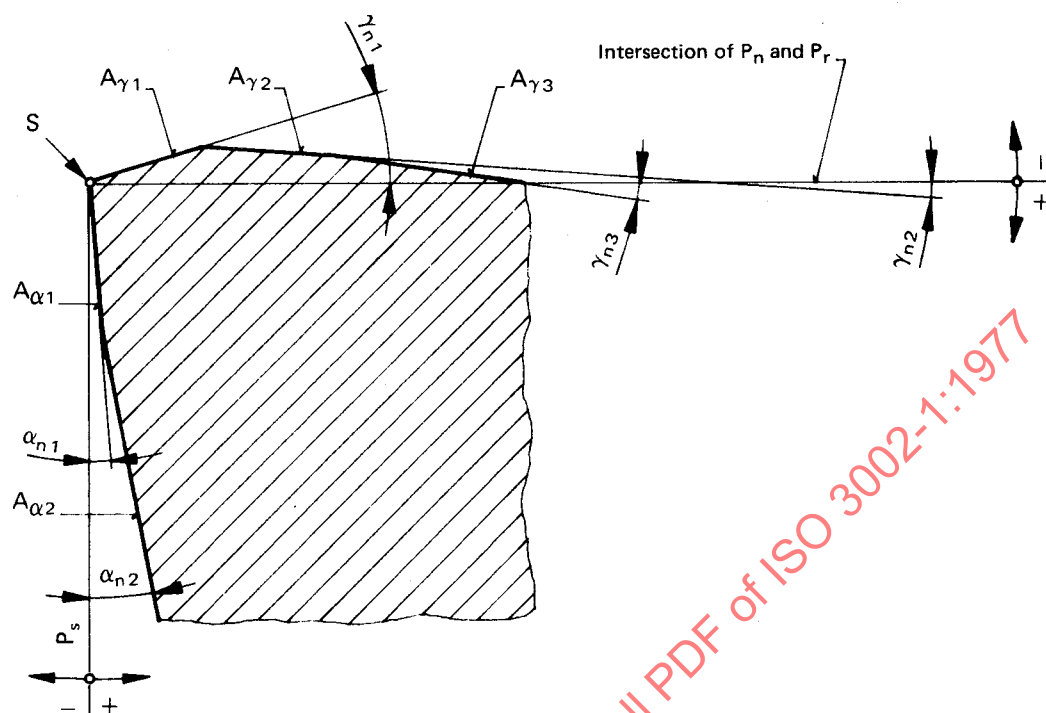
Tool normal rake and tool normal clearance angles on a wedge
